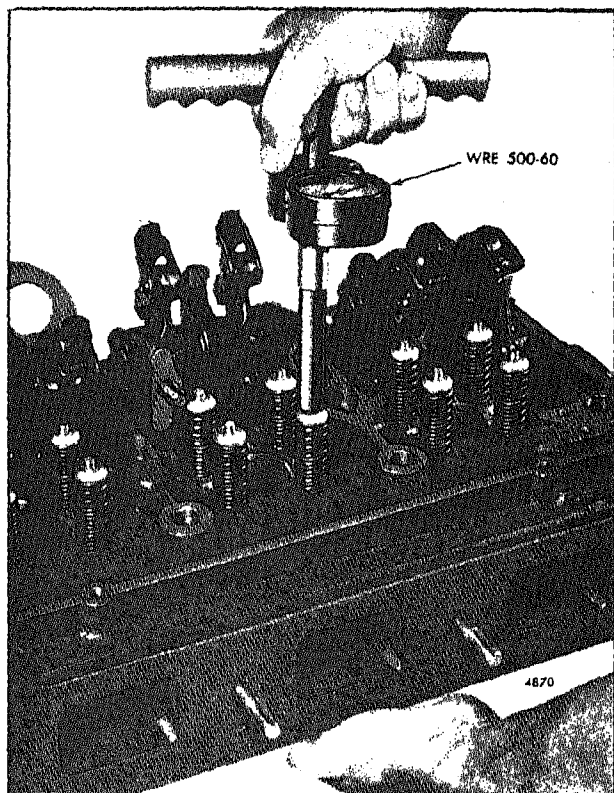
· Checking Valve Opening Pressure with Gage WRE-500-60
